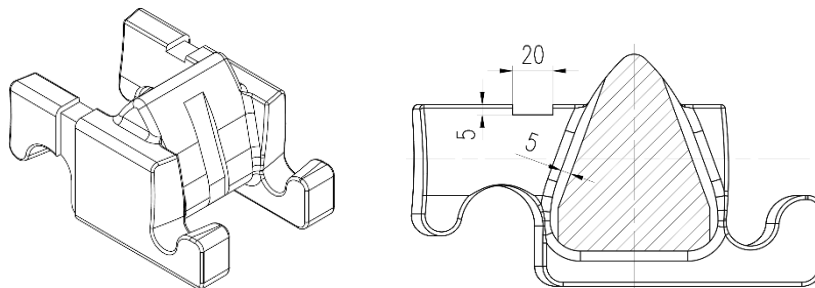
Toothed segment prepared for gluing strain gauges on the side guides and on the tooth flank
